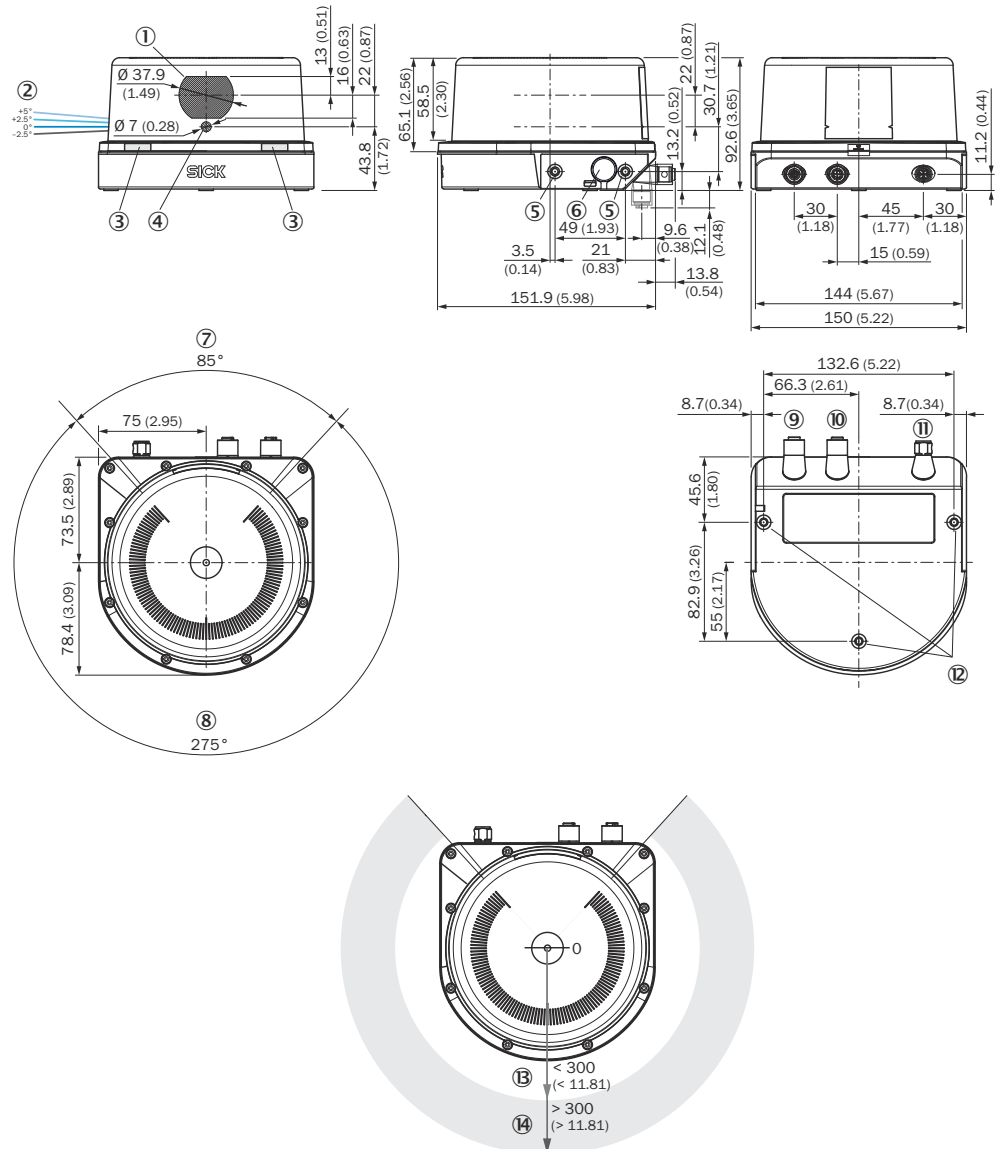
MRS1000 People Counter device structure and dimensions, dimensions in mm (inch)
